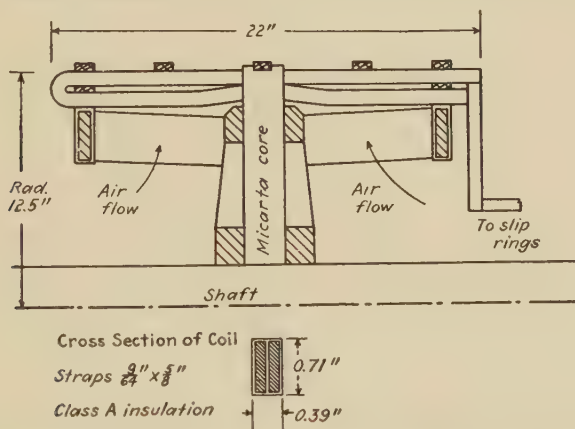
Experimental model for determining dissipation from rotating end windings.
